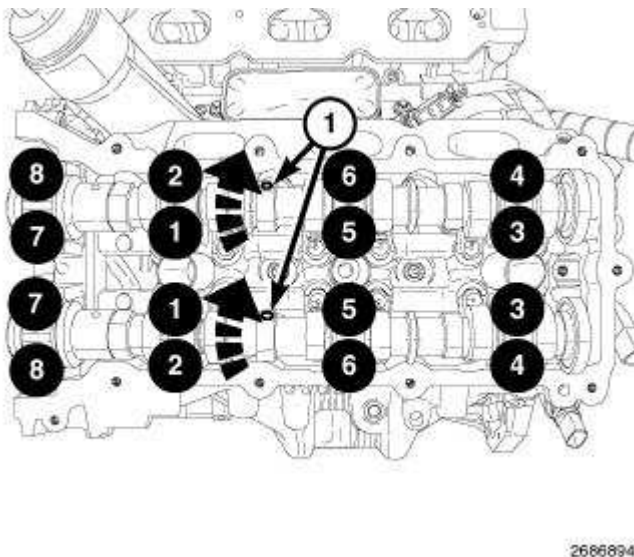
Bearing Cap Retaining Bolts Tightening Sequence - Left
